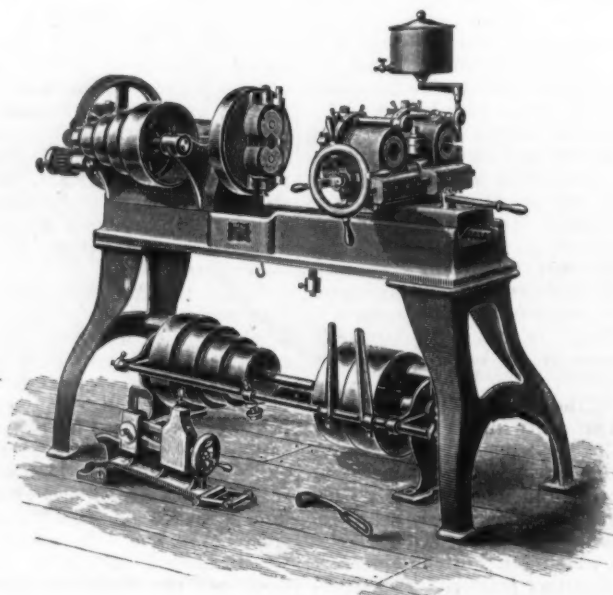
Pipe-Threading, Bolt-Cutting, Nut-Tapping and Cutting-Off Machine.
